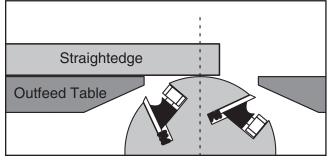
Adjusting outfeed table even with cutterhead body (knife-style cutterhead shown).
